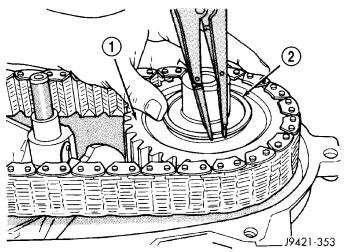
Front Sprocket Retaining Ring Installation 1 - FRONT SPROCKET
